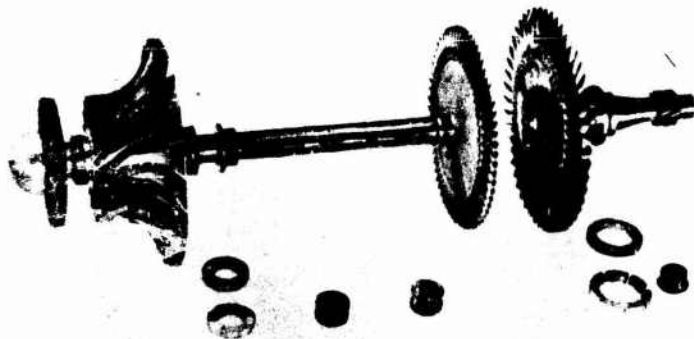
Gas-Producer and Power Section of 400-hp Turbine Engine with Axial-Centrifugal Compressor (left), and Axial Gas-Producer Turbine and Power Turbine
